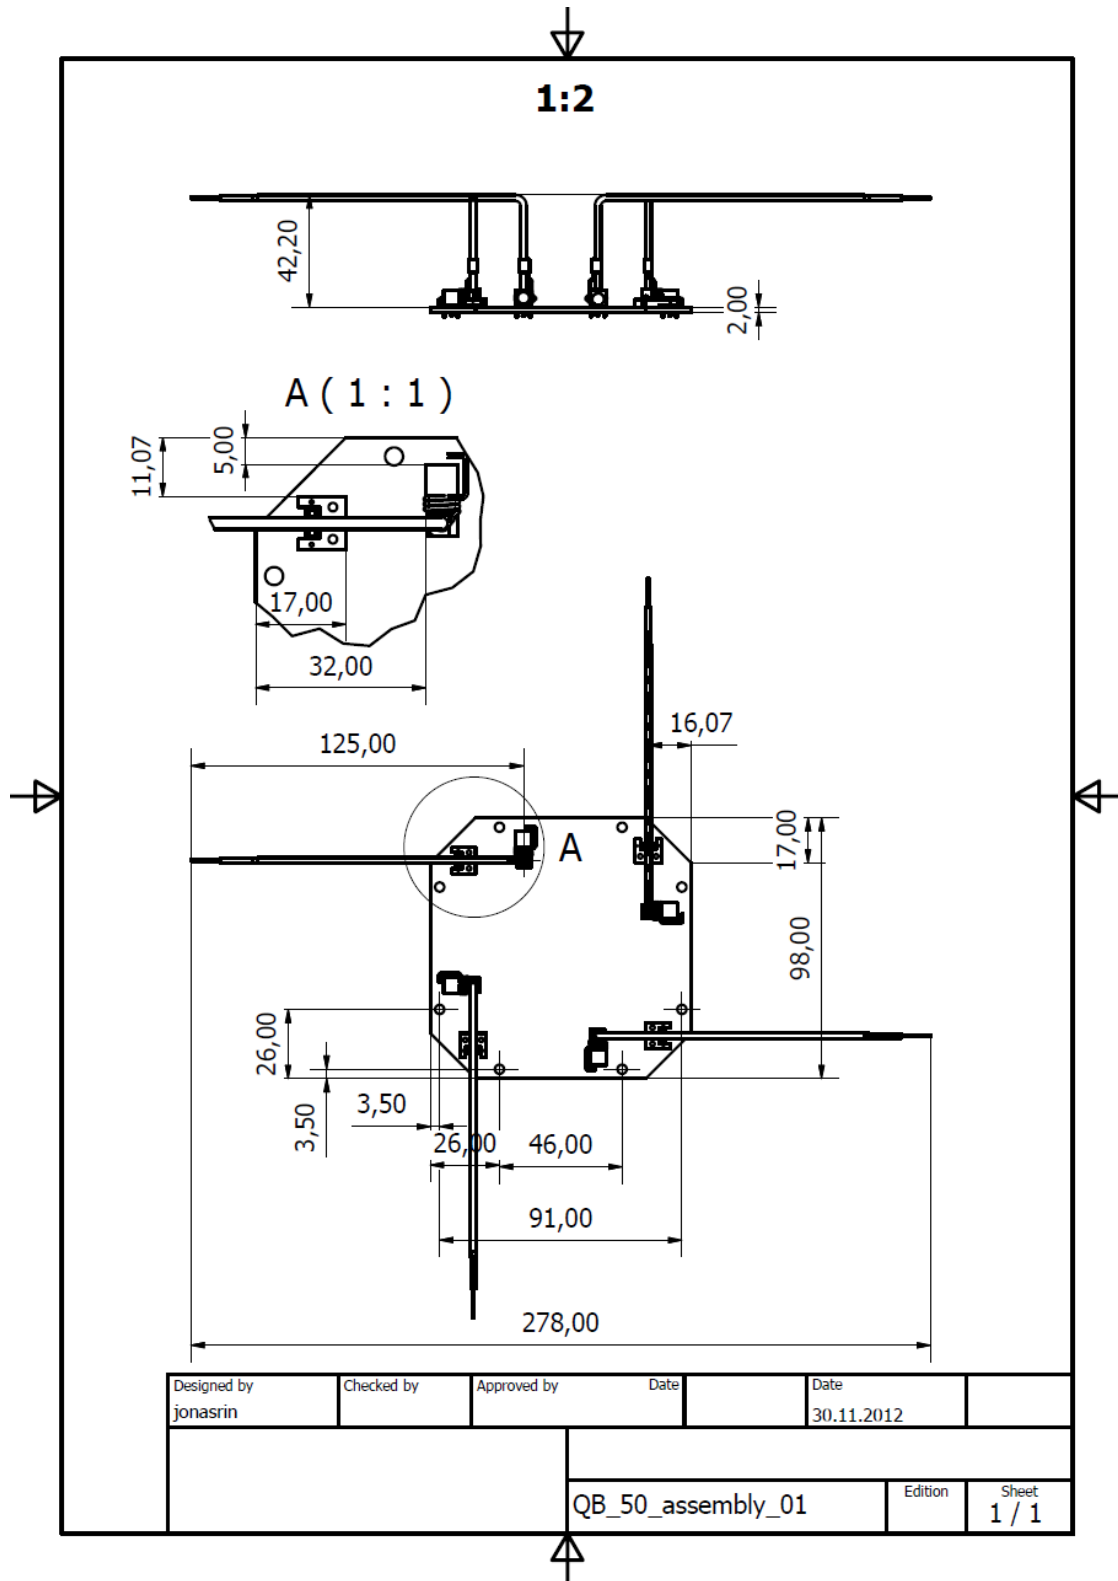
QB50 Science Unit m-NLP boom system drawing
